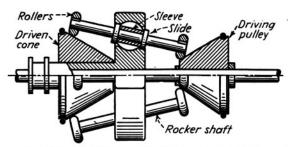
In this transmission, the cones are mounted in line and supported by the same shaft. One cone is keyed to the main shaft and the other is mounted on a sleeve. Power is transmitted by a series of rocking shafts and rollers. Pivoting rocking shafts and allowing them to slide change the speed ratio.
